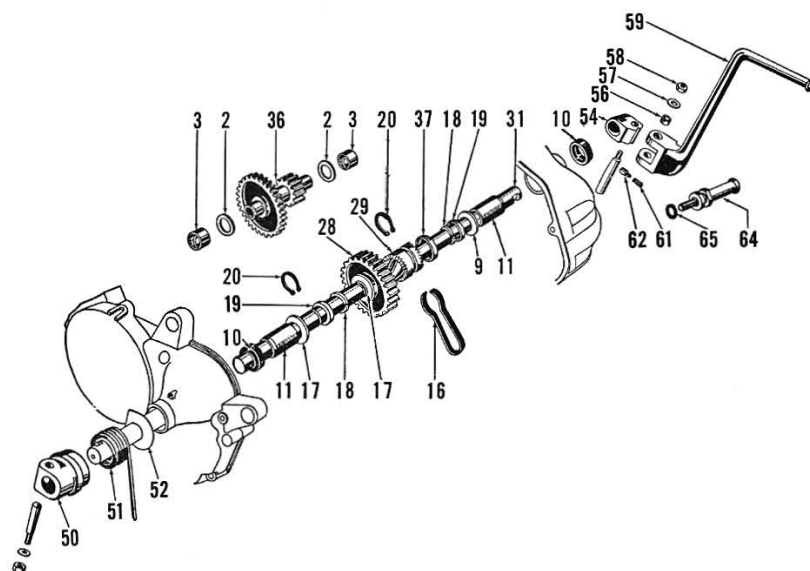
View of starter assembly typical of all models except Mo-Ped.
